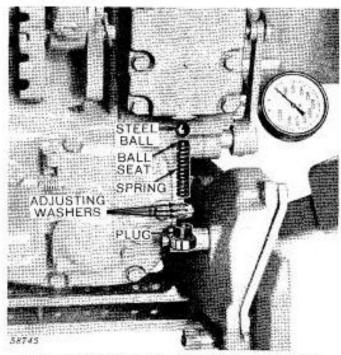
Checking Rockshaft Relief Pressure; Location of Adjusting Washers
